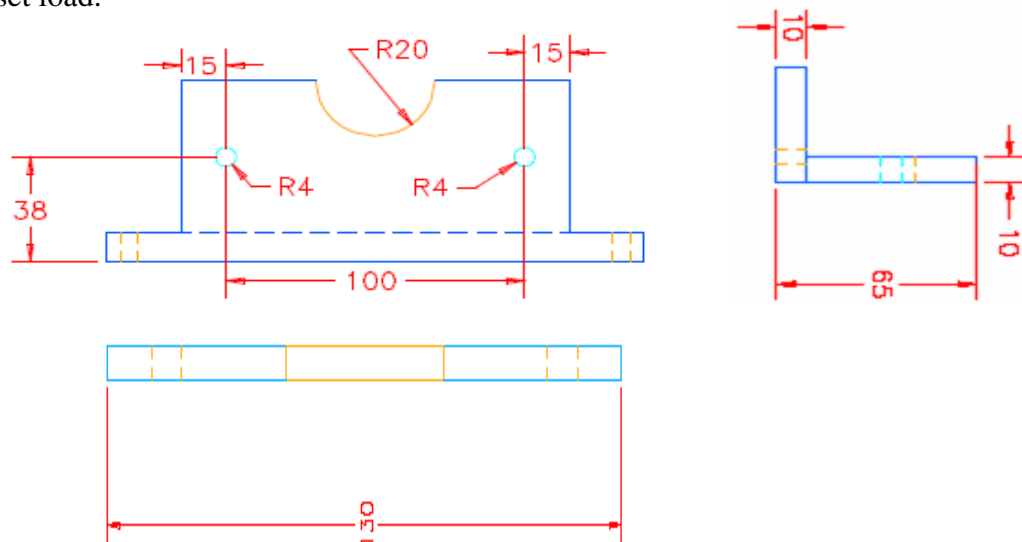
Balanced boundary condition rig design for on-edge impact
